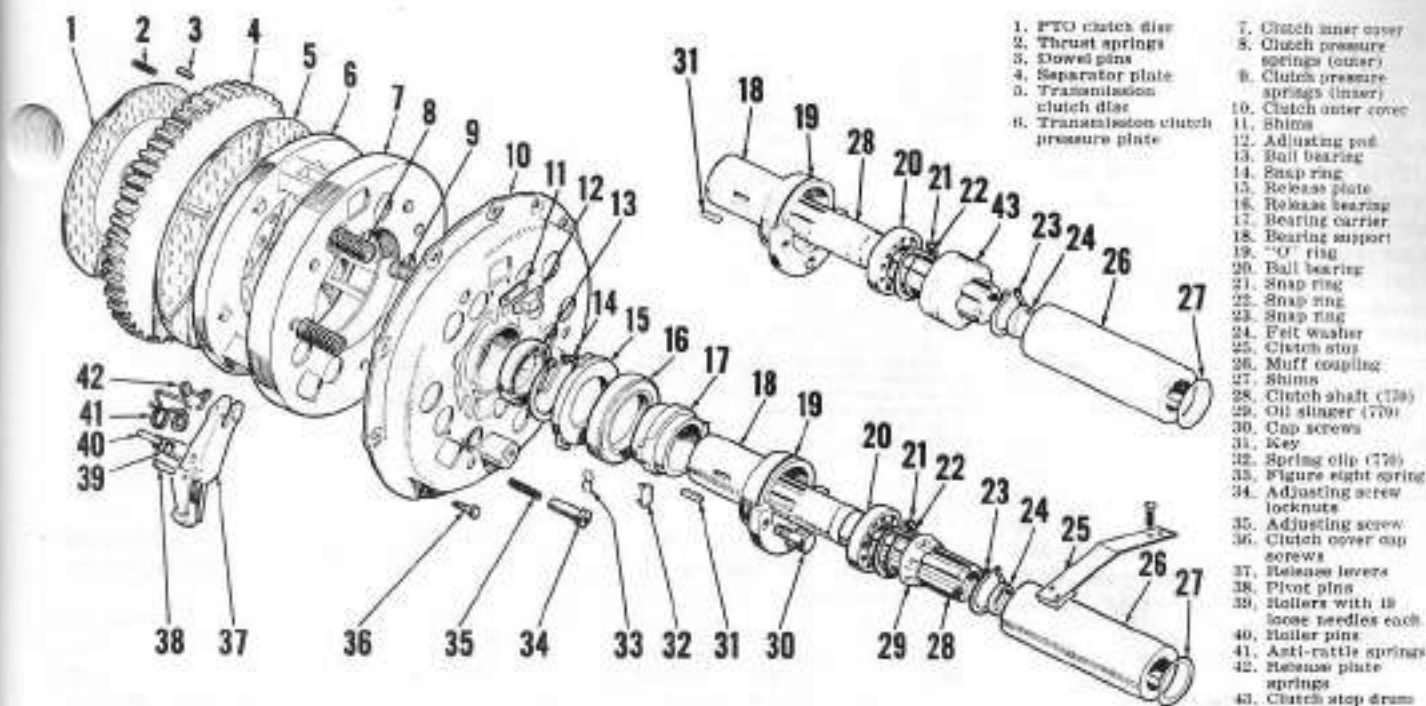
Exploded view showing typical dual clutch assembly used on all models except 1200. On model 770, and early models 880 and 990, spring loaded thrust pad assembly (25) is attached to underside of transmission cover. Friction of pad against muff coupling (26) stops clutch shaft from turning whenever clutch is released; inspect pad and spring when transmission cover is removed.
